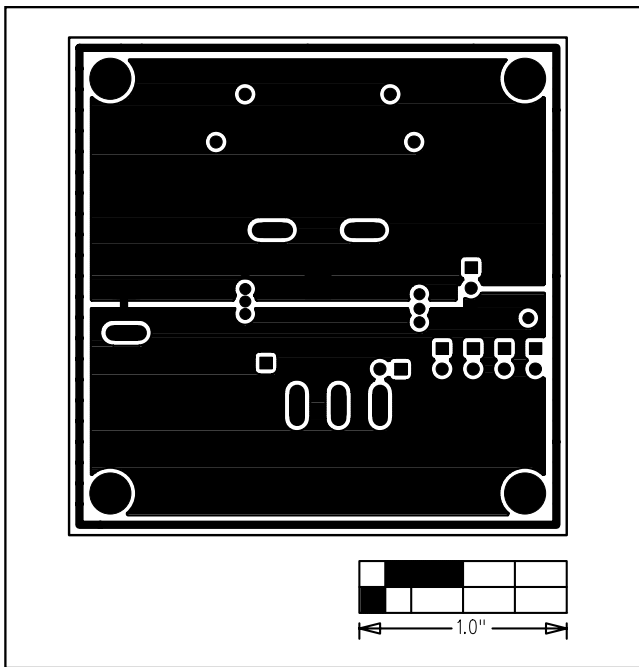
MAX9713 EV Kit PC Board Layout—Layer 2 (GND)
